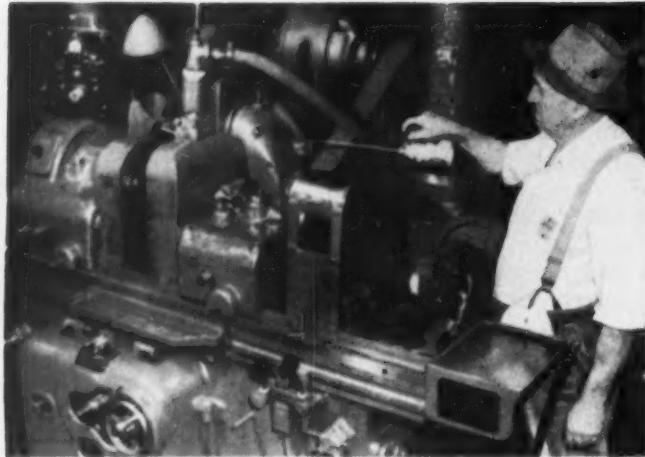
No questions arise regarding type of lubricant to use or frequency of oiling. Such information is provided on the lubrication card furnished for each machine and by color coding on the machine itself.
